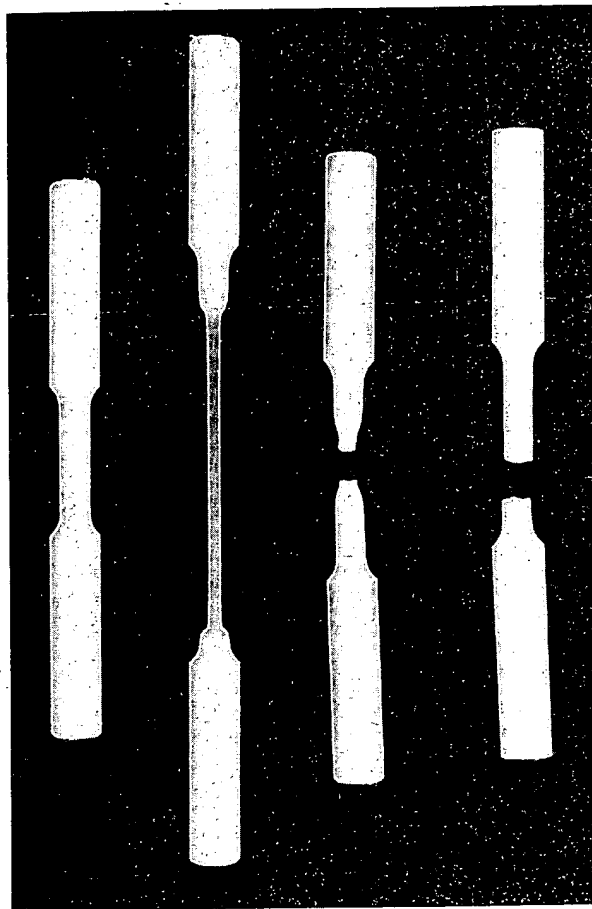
Tensile specimens of metals (left to right): untested specimen with 9 mm diameter test section, and broken specimens of gray cast iron, aluminum alloy 7075-T651, and hot-rolled AISI 1020 steel. (Photo by R. A. Simonds.)
